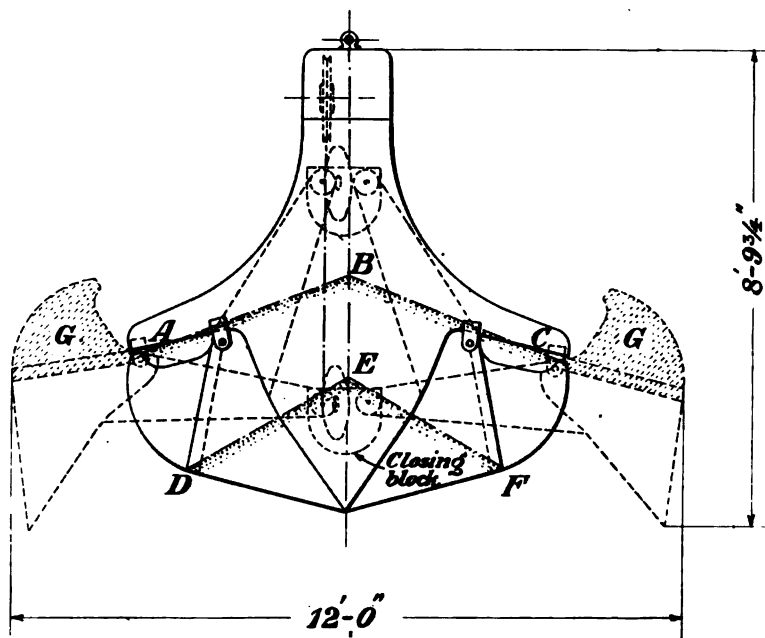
Elevation of the Brown Hoisting Machinery Co.'s Two-Rope Grab Bucket.
